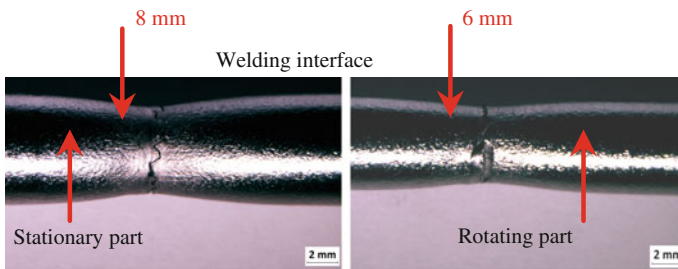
Fracture position for specimens of 6 and 8 mm, X5
